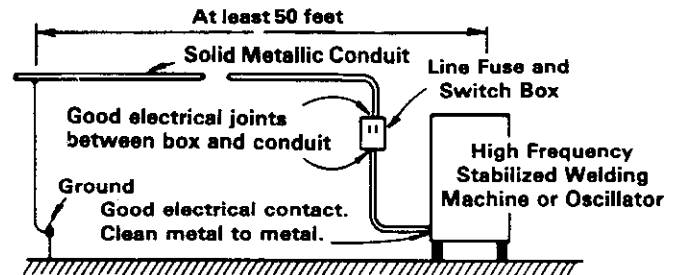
1. Power Service Installation H.F. Stabilized Arc Welding Machine
